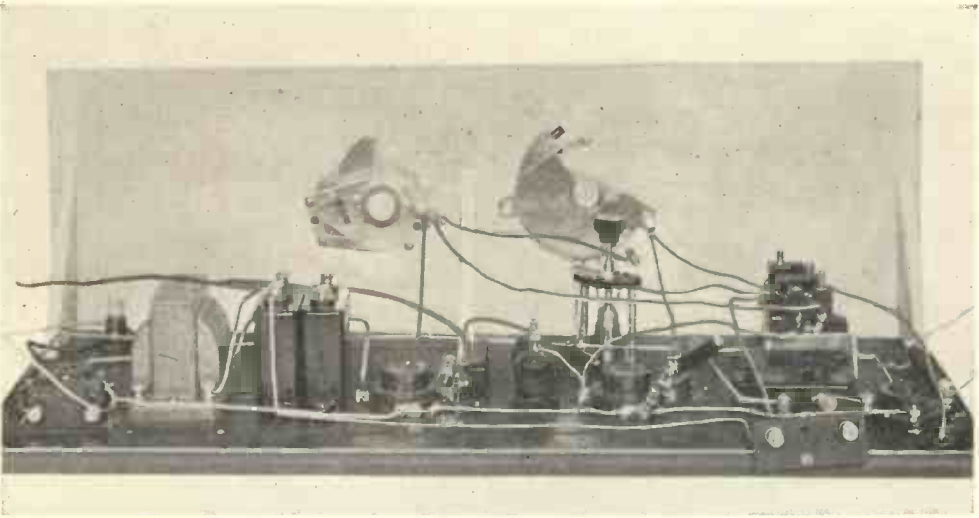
LAYOUT OF COMPONENTS ON BASEBOARD.
